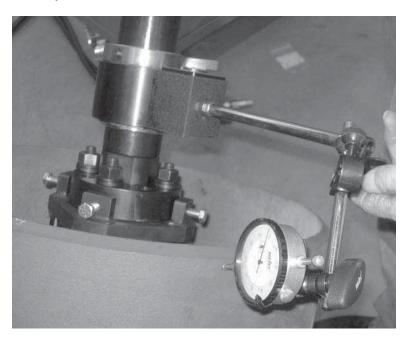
The dial indicator is provided for centering the independent chuck in the pipe.
